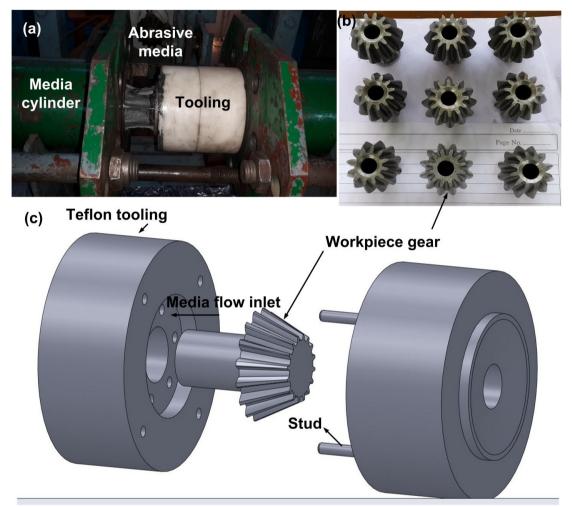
(a) A close view of the tooling and a media cylinder as attached to the two way AFM experimental setup, (b) image of the bevel gears prior to machining and (c) a 3D model of the tooling and the bevel gear.
